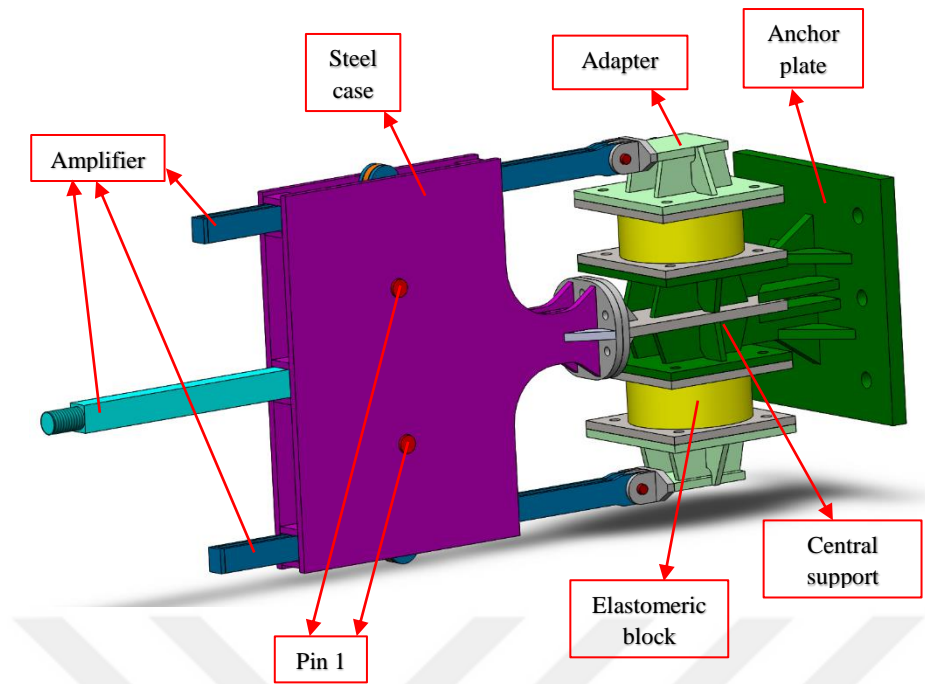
Isometric view of the 3D SolidWorks model of Prototype I
